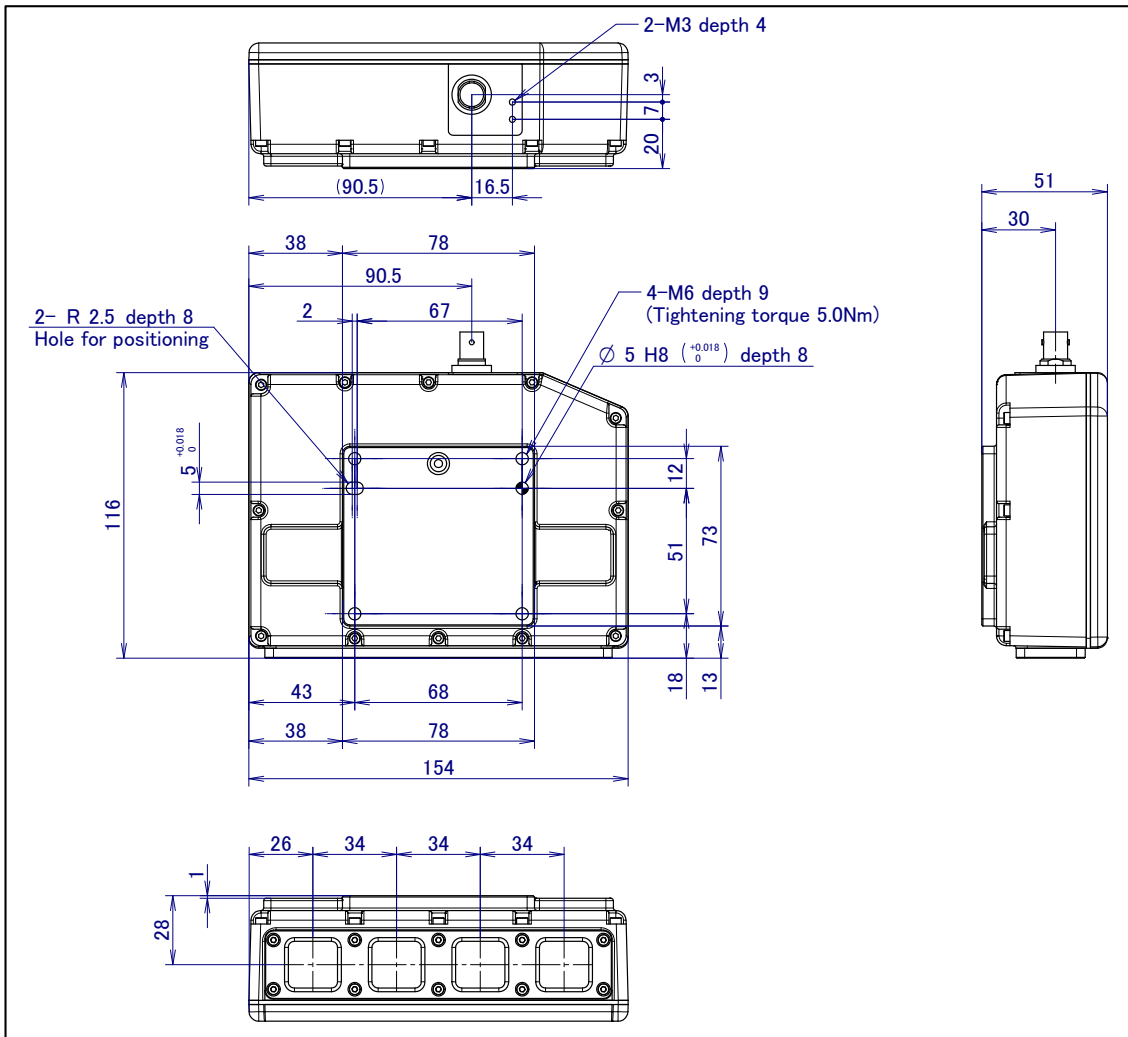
(a) External dimensions of the 3D Vision Sensor
